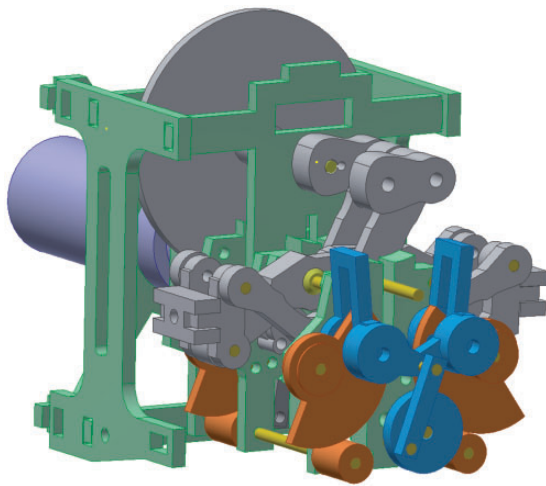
Three-dimensional CAD drawings of the control mechanism.
